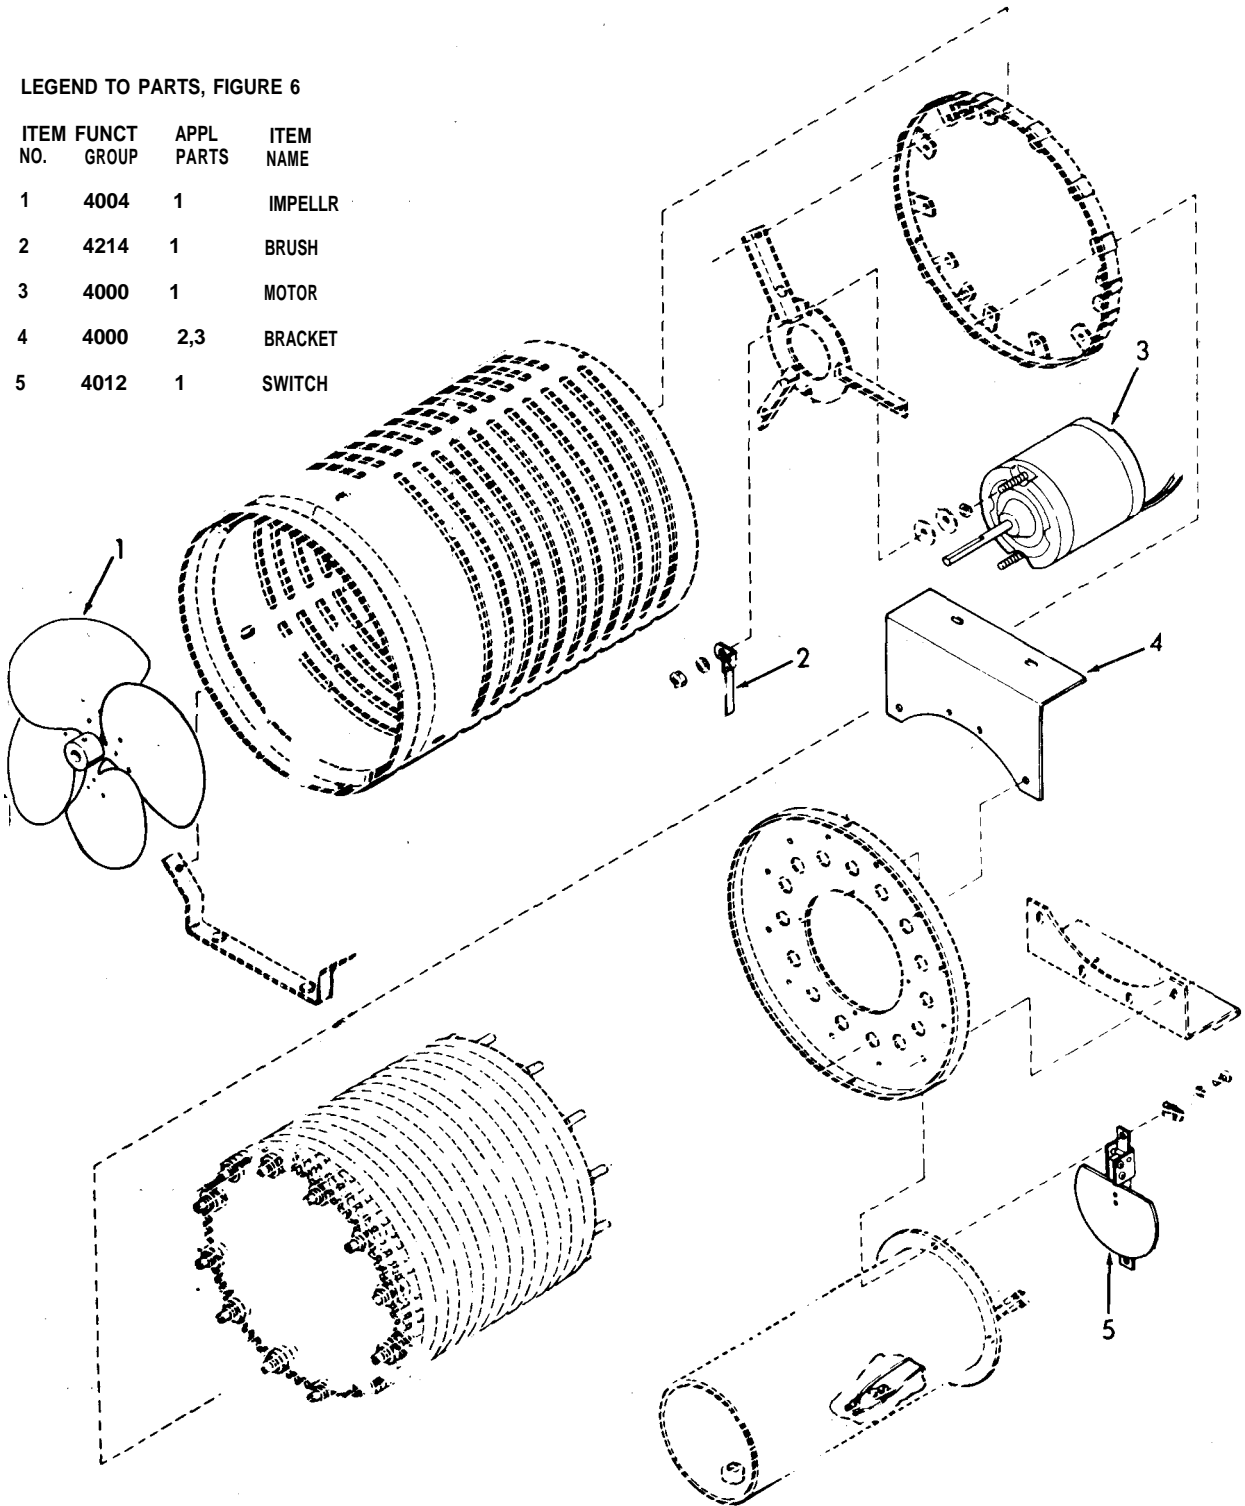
MOTOR, IMPELLER AND SWITCH
